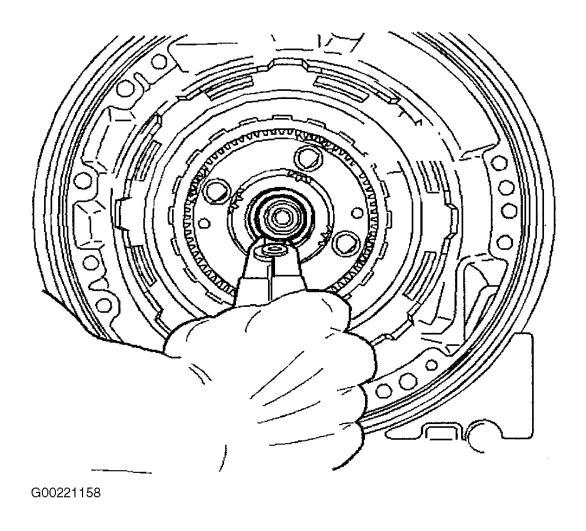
Removing/Installing Input Carrier To Output Shaft Retainer
